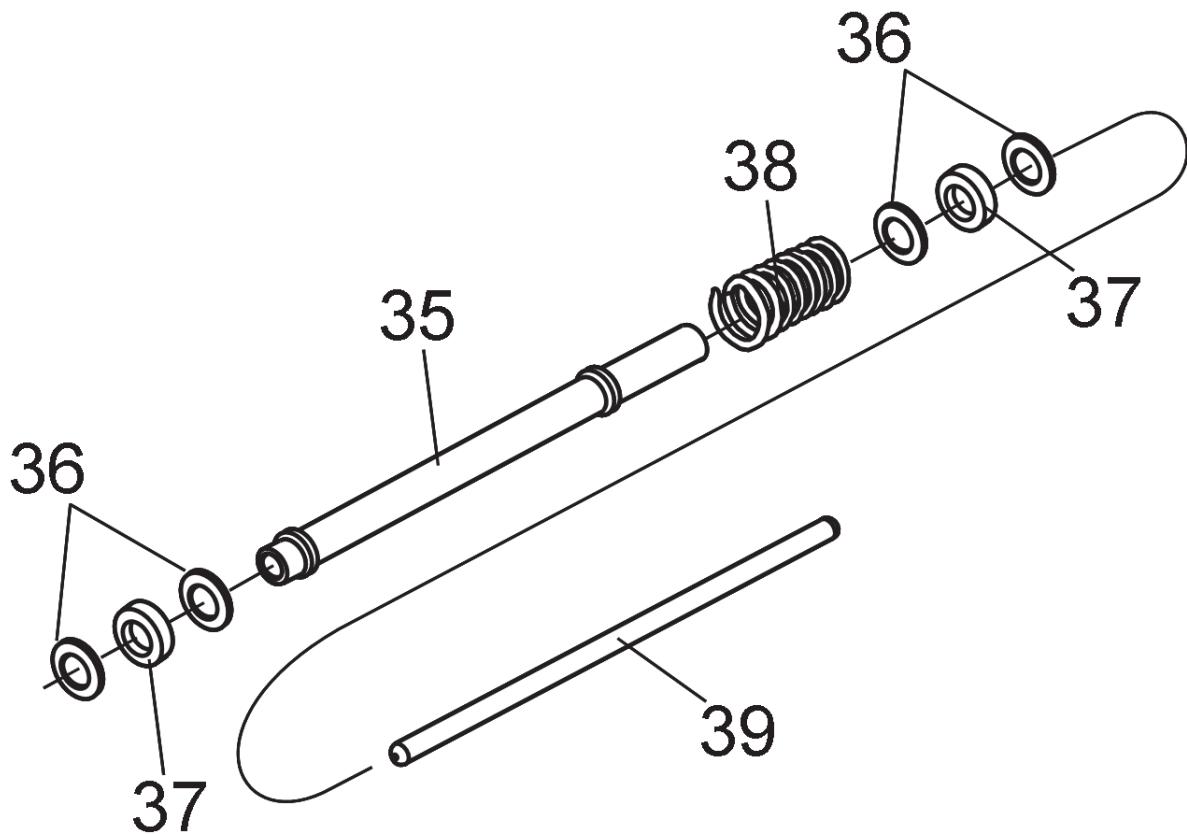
Updraft Cylinder Pushrod Tube Assembly A B C
